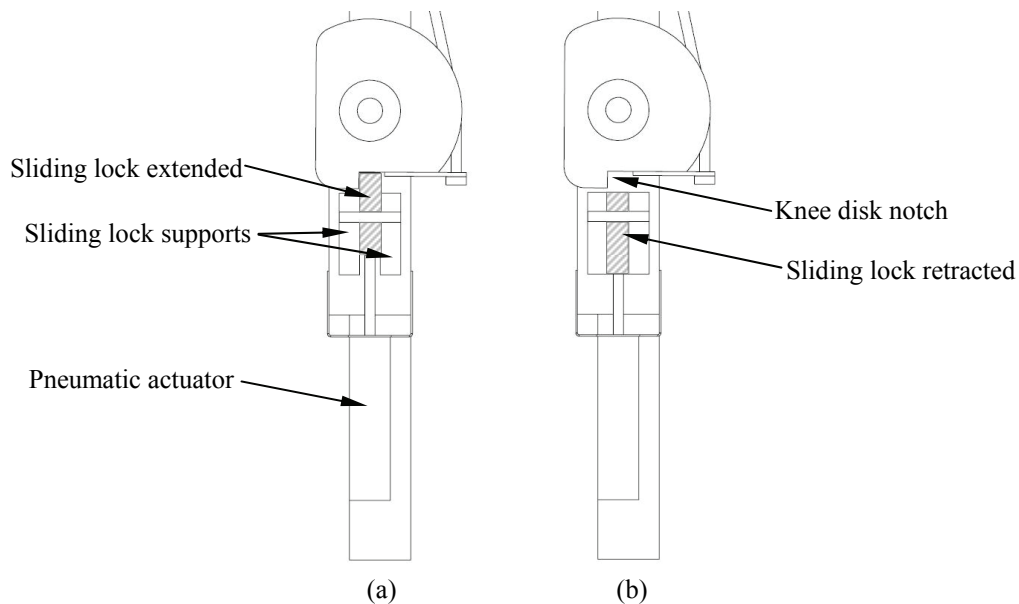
Knee disk assembly showing the sliding lock (a) engaged and (b) disengaged from the knee disk notch.
